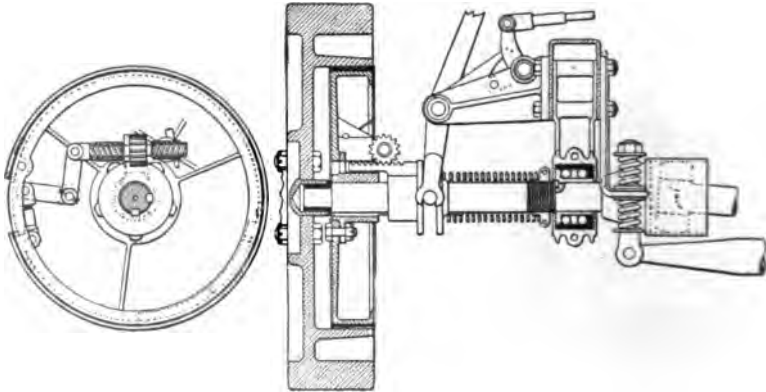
End View and Cross Section of the Packard Expanding Band Clutch.
